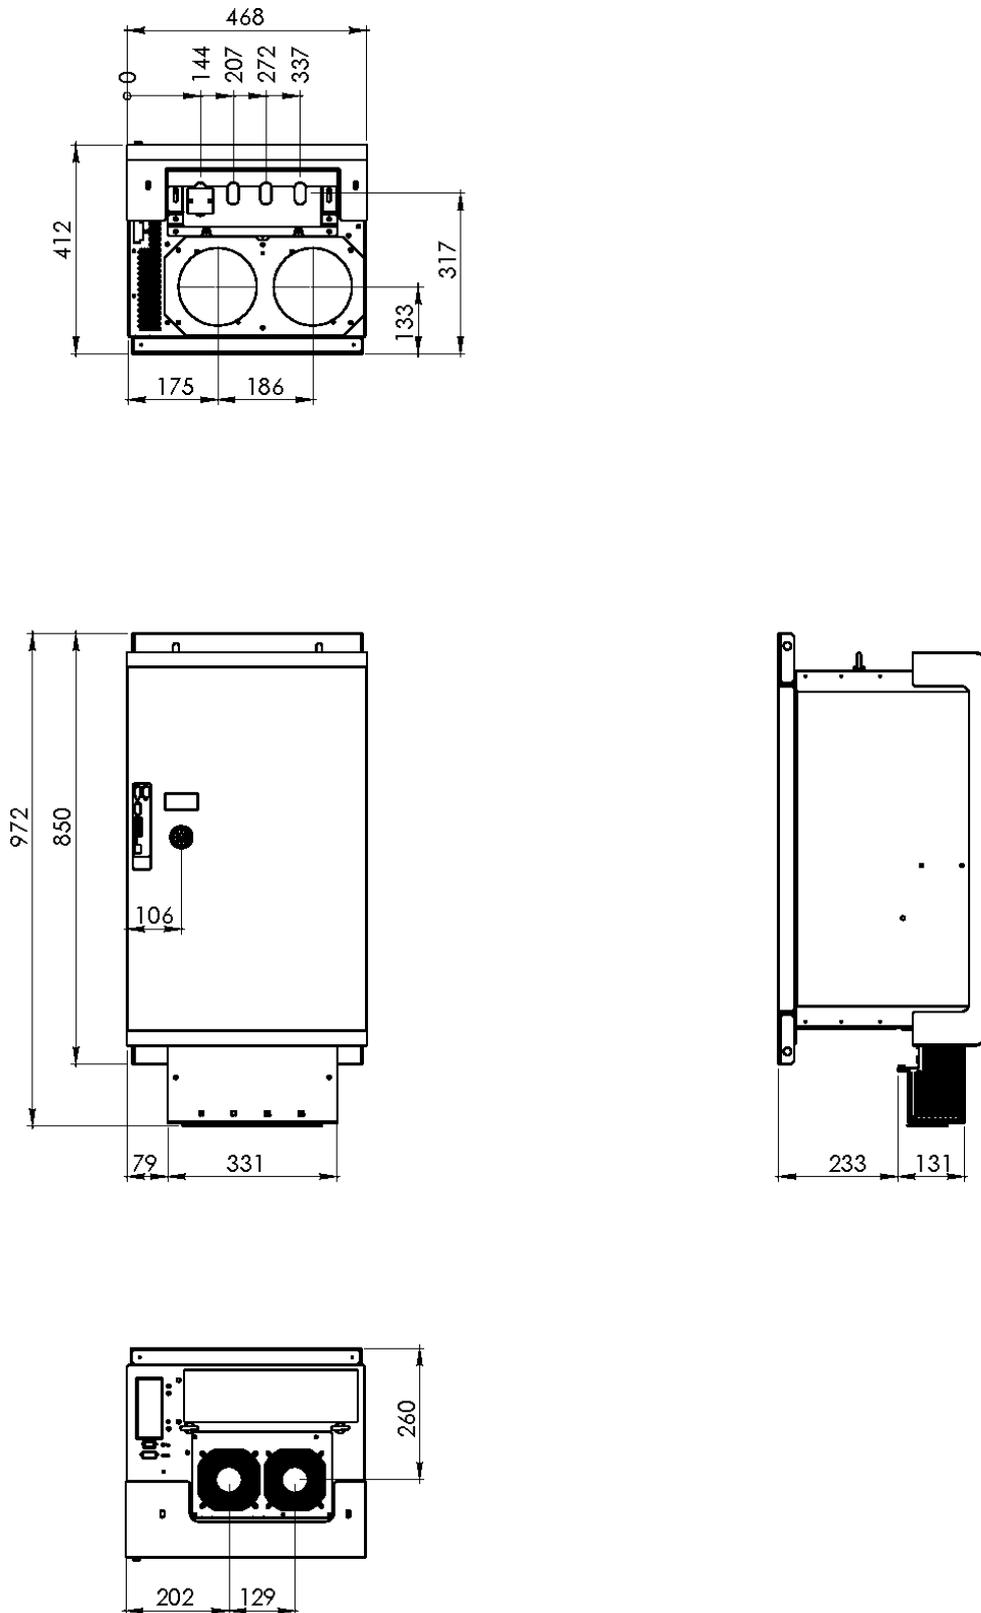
Dimensional drawings ECOsine® active FN3420-100/120-xxx-3
